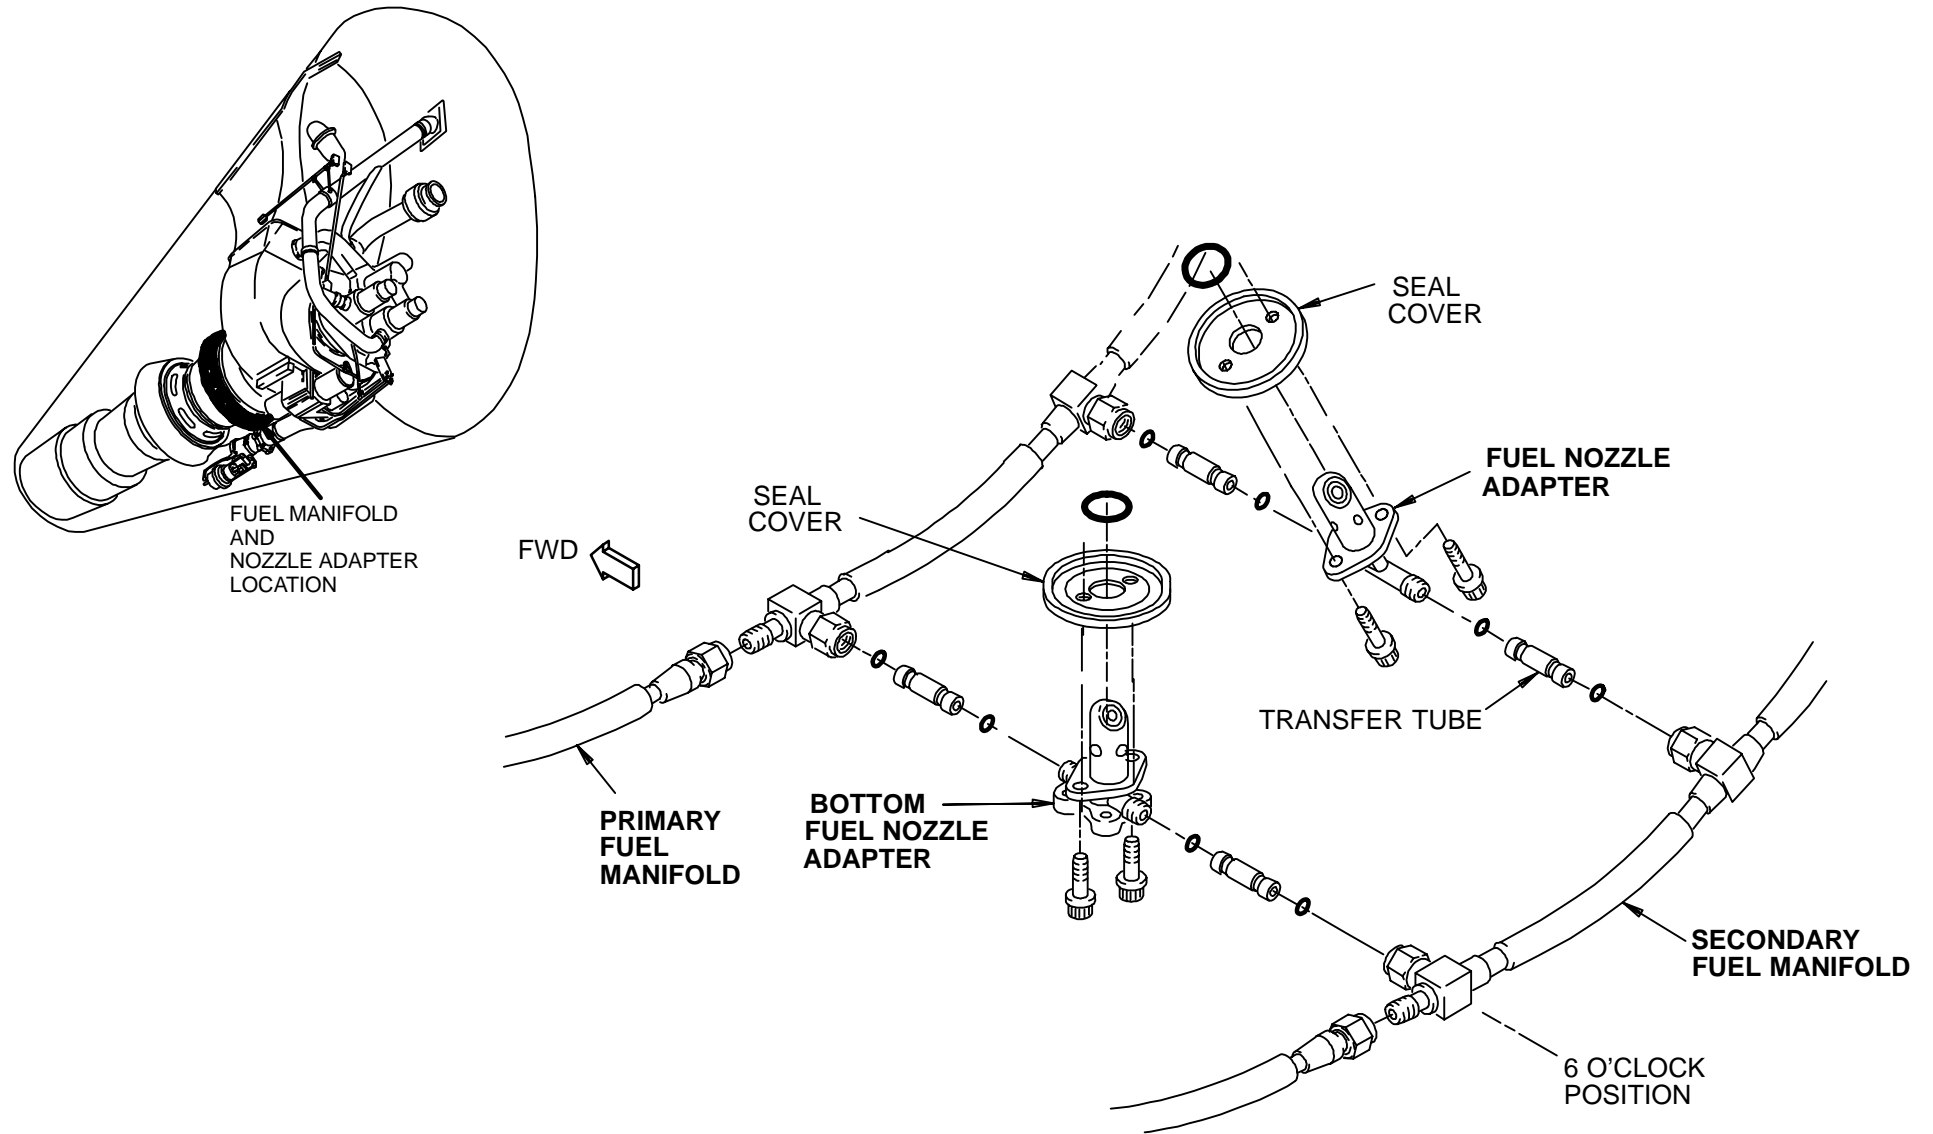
FUEL MANIFOLD AND FUEL NOZZLE ADAPTER
